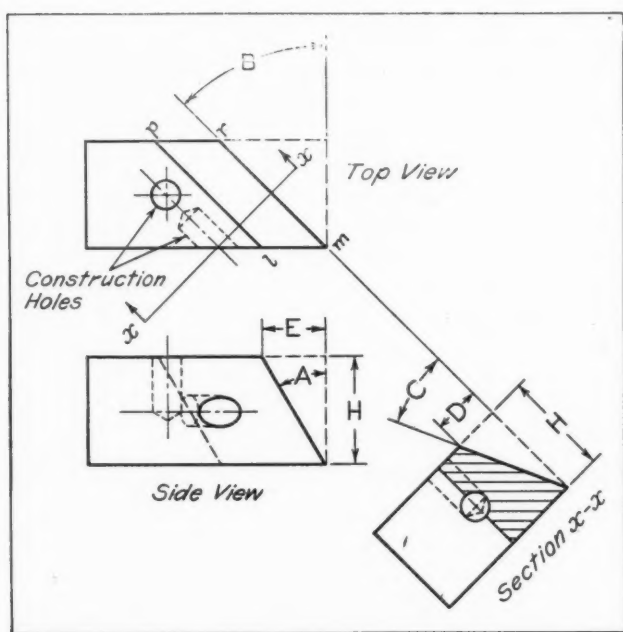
Top and Side Views of Compound-angle Block which Show that Component Angles *A* and *B* Only are Insufficient for Accurate Machining and Checking. Addition of Two Construction Pin Holes and View *x-x* Showing Compound Angle *C* Fulfills the Requirements
